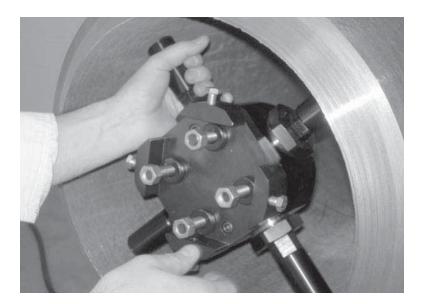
Screw the legs out to snug the chuck inside the pipe.
